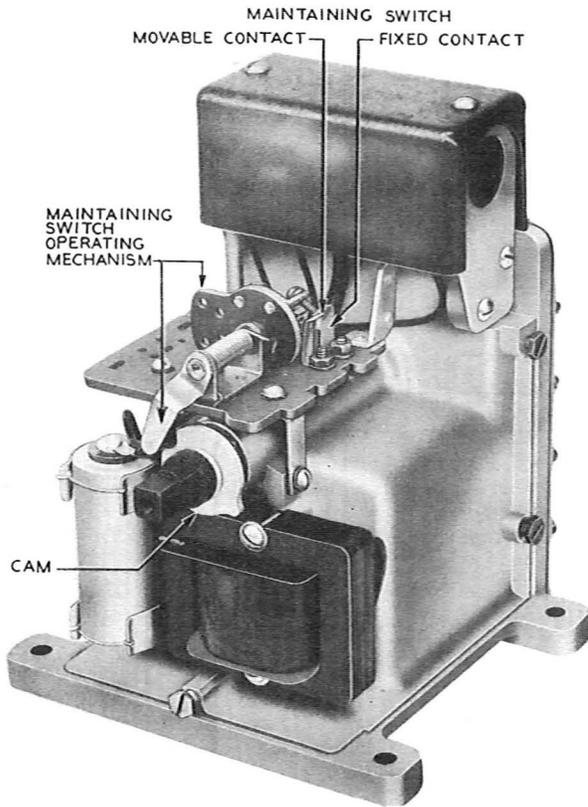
M204A-type Shutter Motor - Cover Removed
